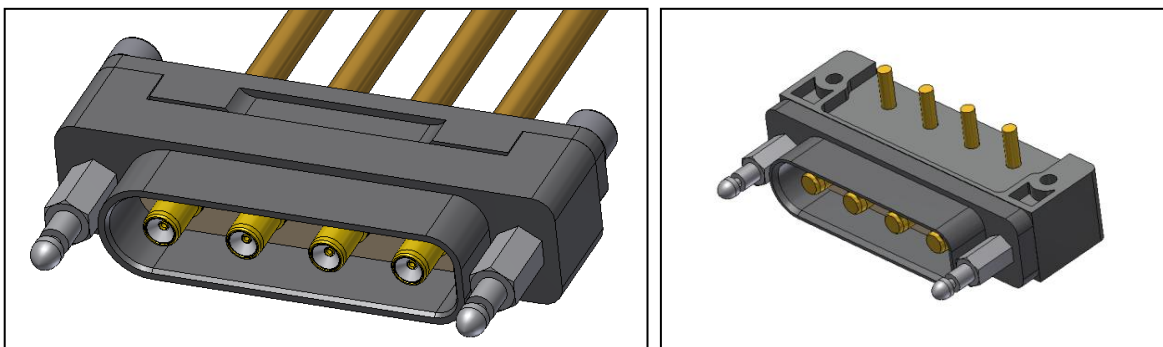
View of MMCA connector (in-line and PCB versions) with fast locking hardware .
